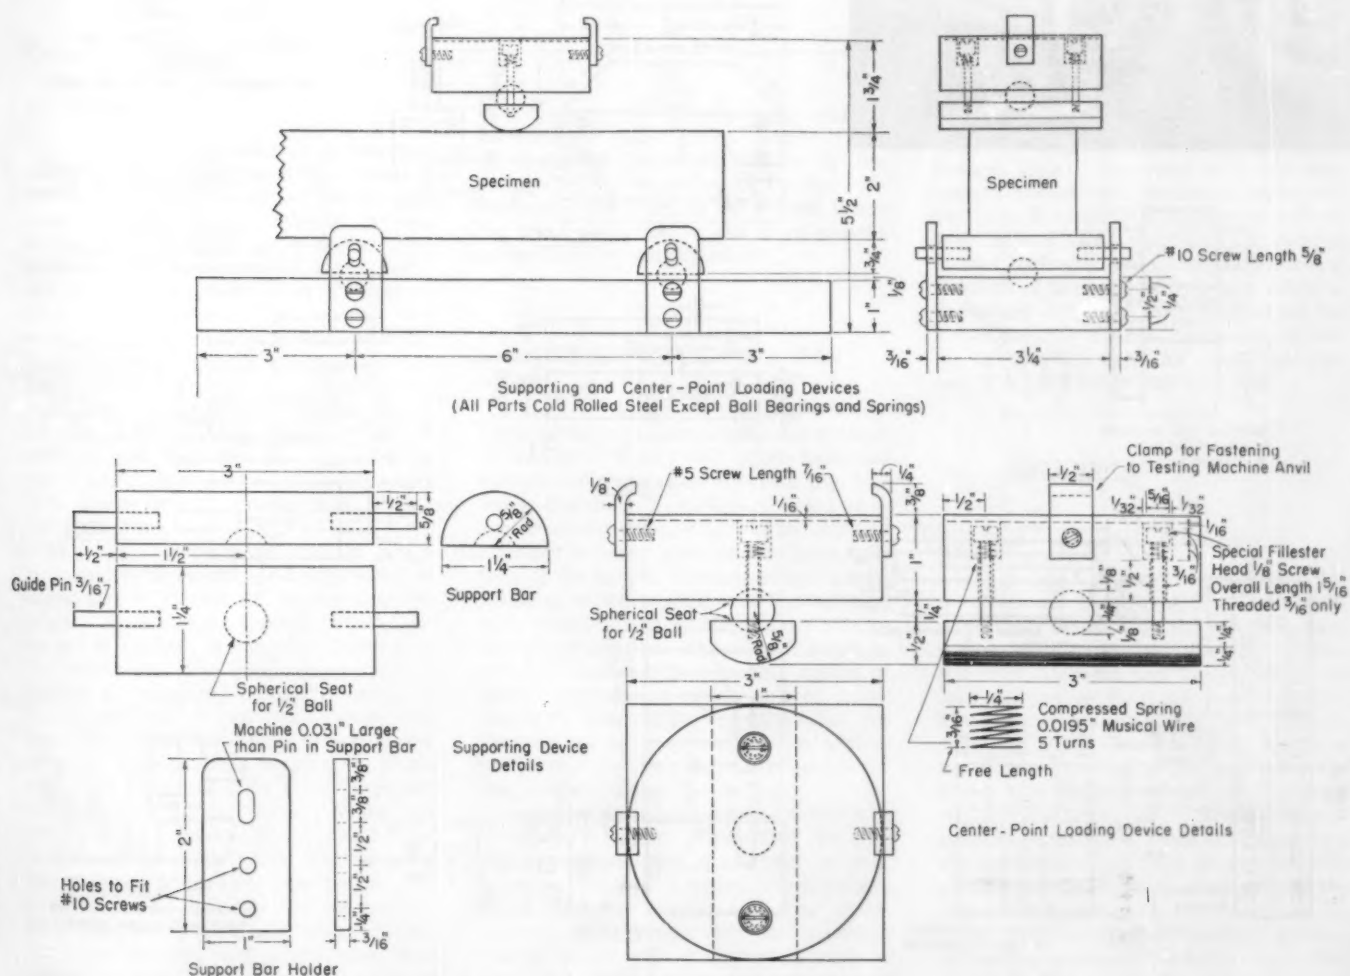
Center-Point Supporting and Loading Devices for Testing 2 by 2-in. Mortar Prisms in Flexure in a Compression Testing Machine.
